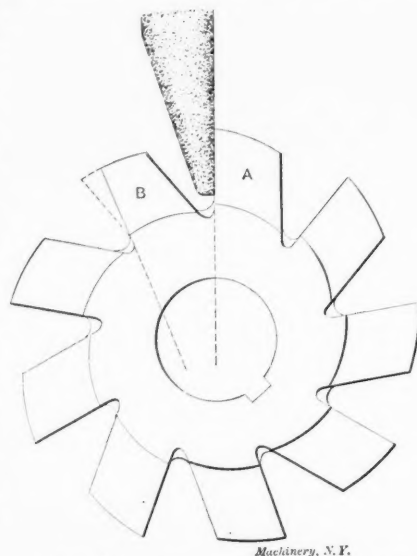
Correct and Incorrect Methods of Grinding Gear-cutter Teeth.
